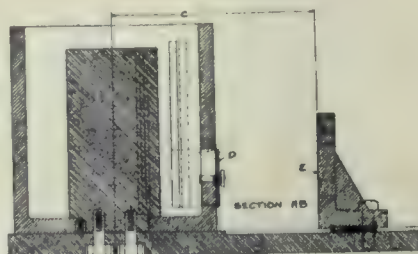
Adjusting Brush Holder of the Yoke Type.
